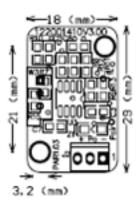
Drive Gas Pressure Sensor Board, Top View
